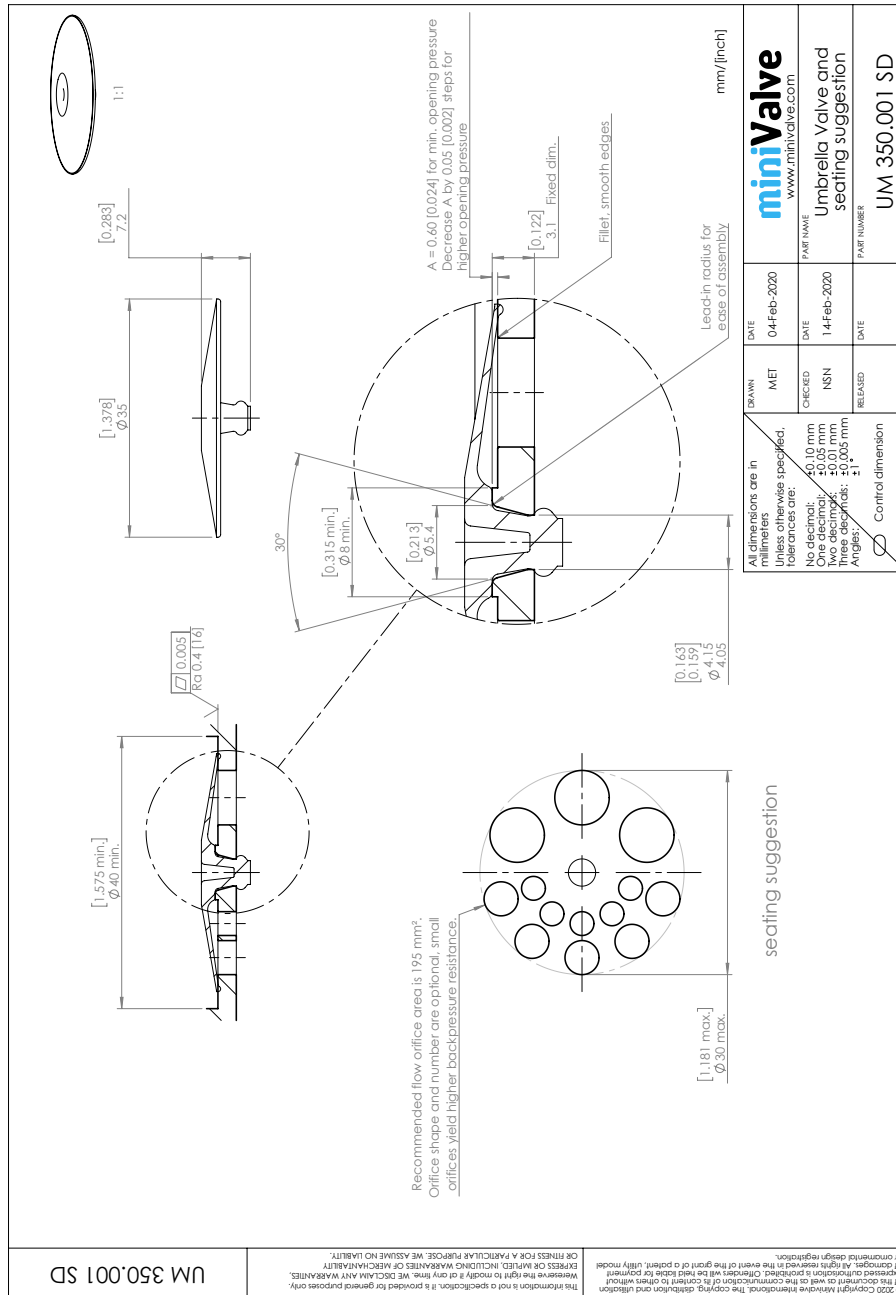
Umbrella valve technical drawing including valve seat details, by Minivalve International B.V.
